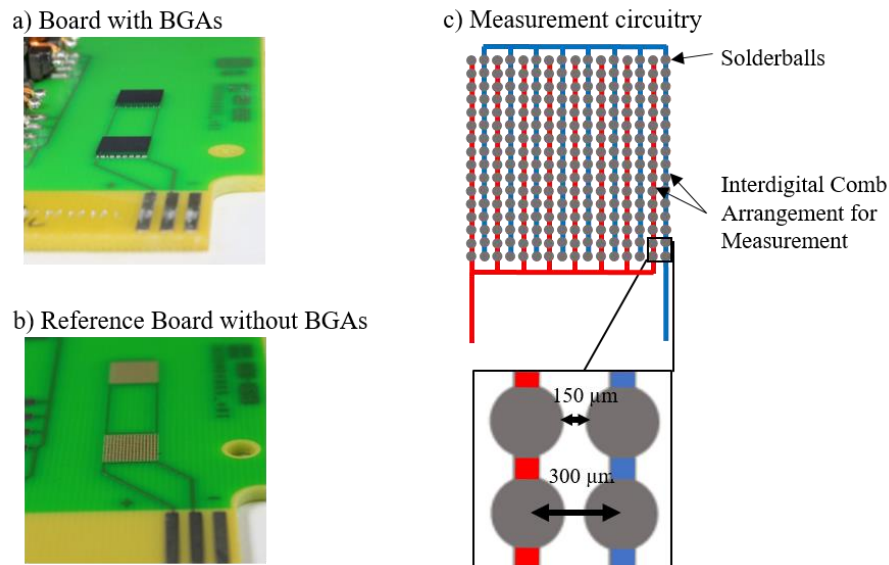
Photographs of test board with assembled BGAs (a) and Reference Board without BGAs (b). The measurement circuit based on an interdigital comb arrangement is schematically displayed in c) Solder balls with $300\ \mu\text{m}$ pitch distance are shown in grey, the two Sn-lines representing the electrodes are displayed in blue and red.
